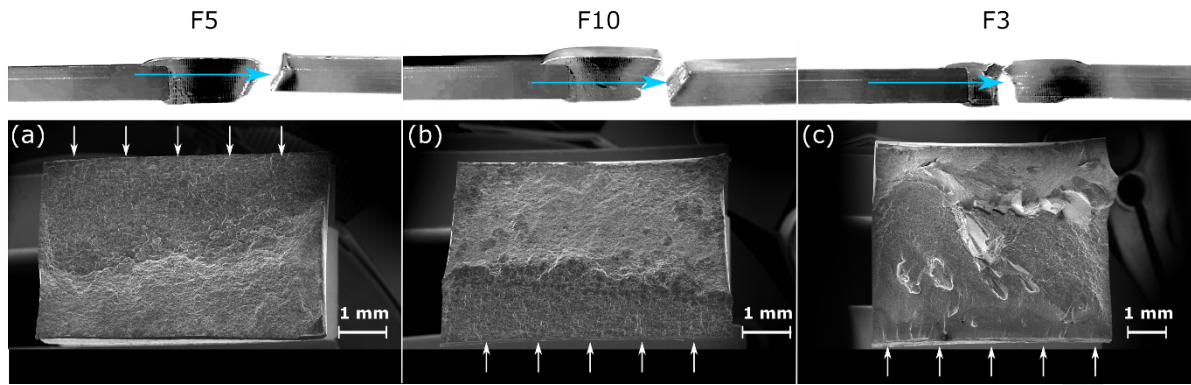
SEM images of selected fracture surfaces of broken fatigue specimens taken from different parts the Al-steel HYB butt weld; (a) specimen F5 tested at a stress range of 112 MPa, (b) specimen F10 tested at a stress range of 160 MPa and (c) specimen F3 tested at a stress range of 135 MPa. Blue arrows point towards the fracture surfaces being examined, while white arrows indicate the fatigue crack initiation point in each case.
